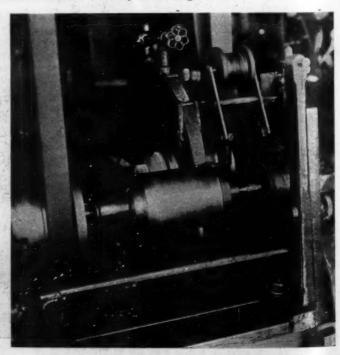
GRINDING CIRCUMFERENCE OF PISTON RINGS.
